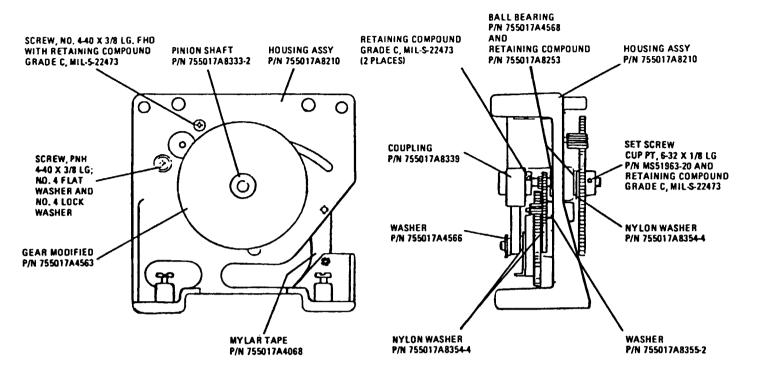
Tank Circuit Module Assembly 1A8, PN 755017A4500 (Sheet 2 of 3)
